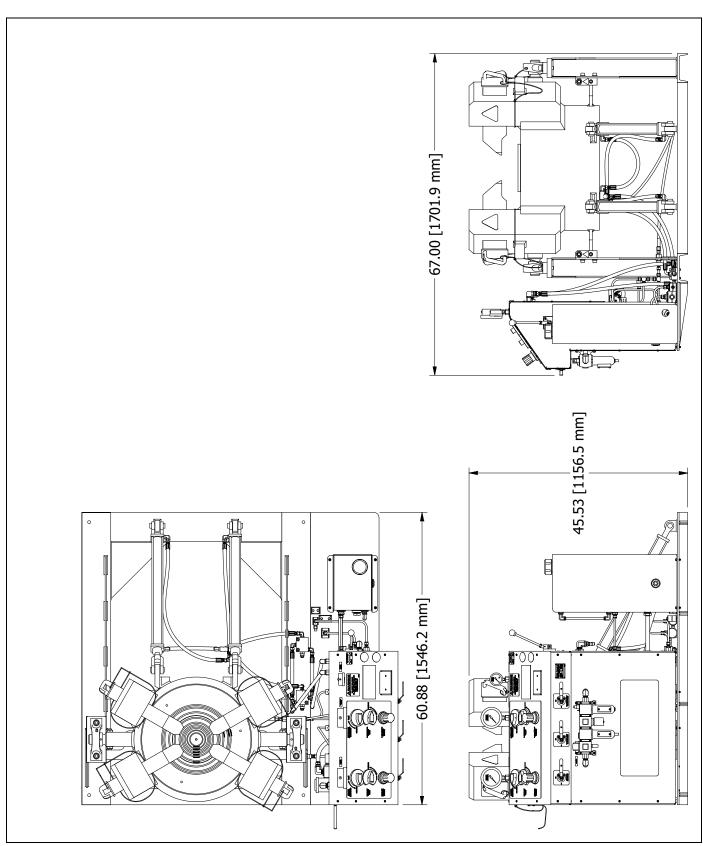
UFV-12-100T AND UFV-14-165T CLAMP FIXTURE DIMENSIONS
